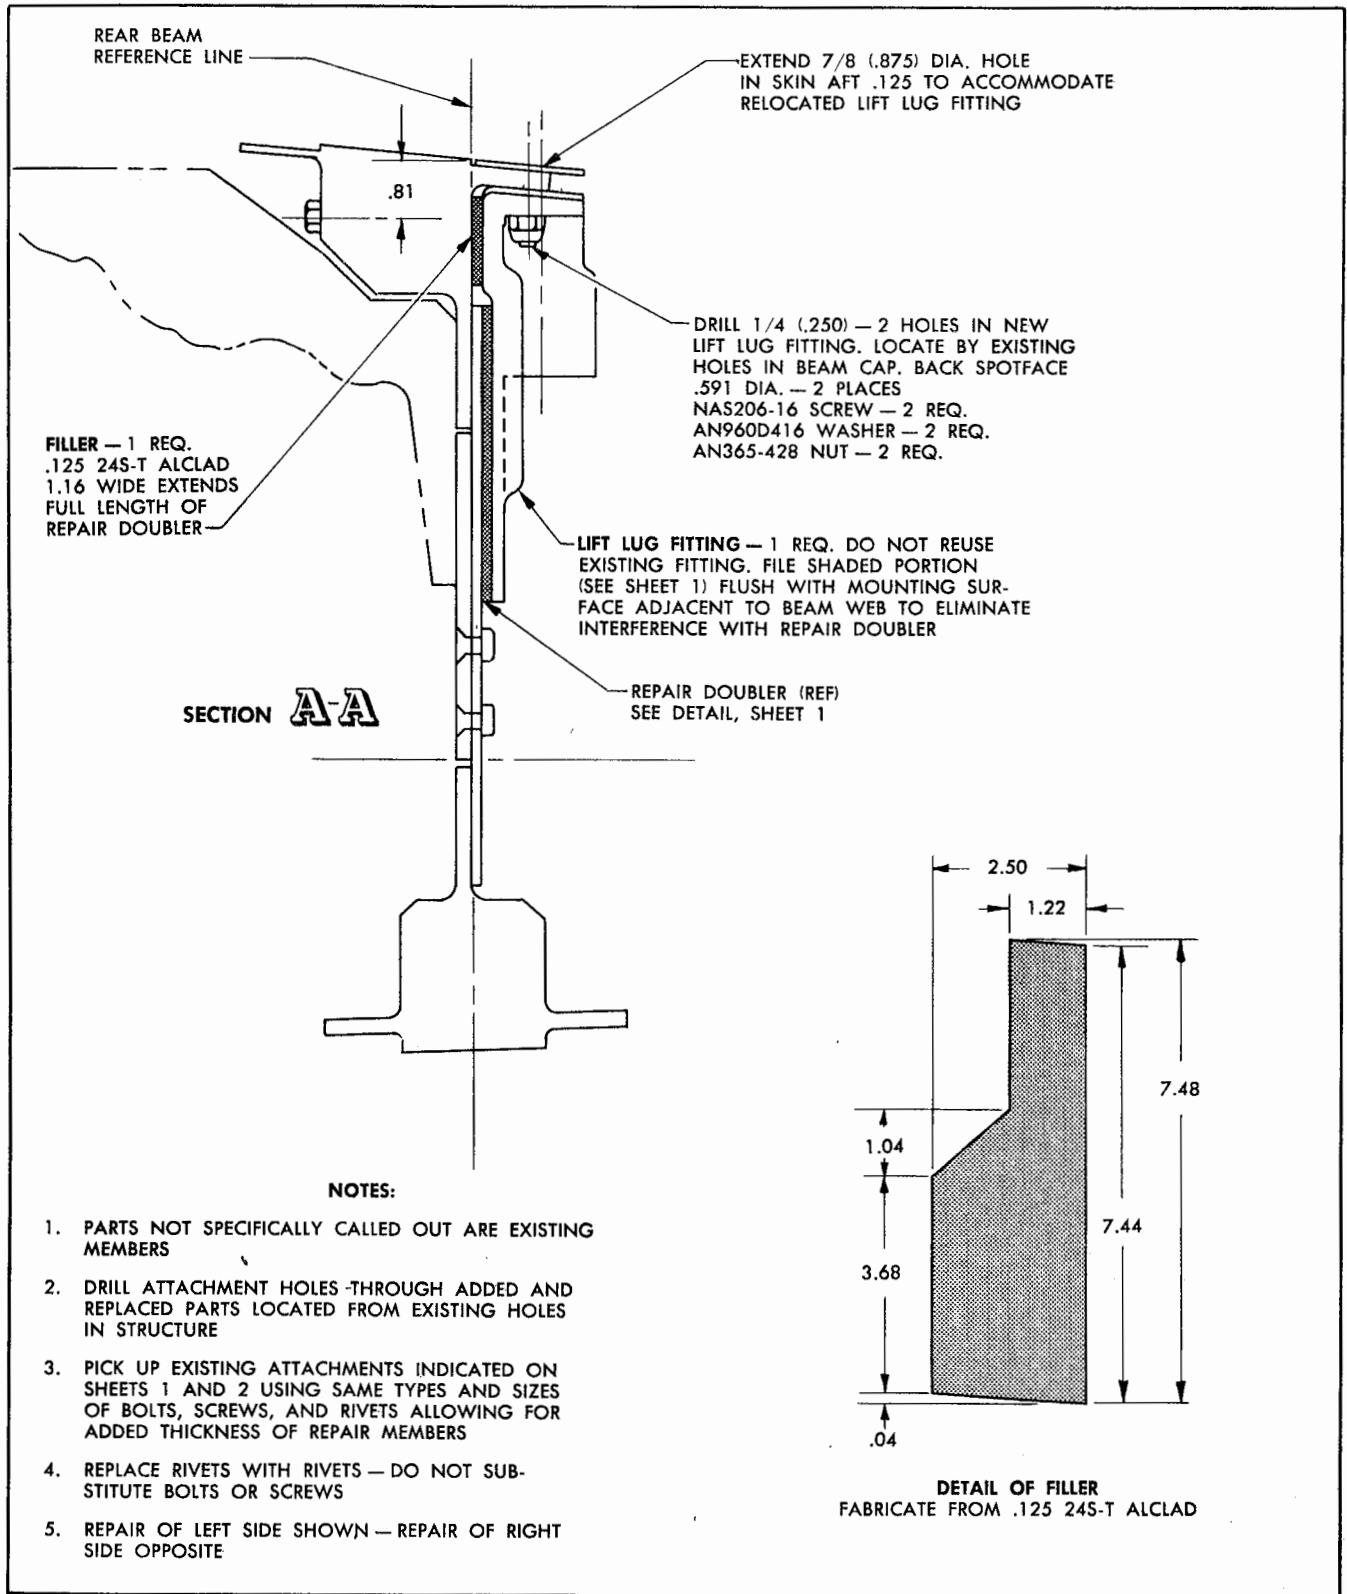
A (Sheet 2 of 2 Sheets) — Repair to Rear Beam Upper Cap Web Attaching Flange at Landing Gear Trunnion
